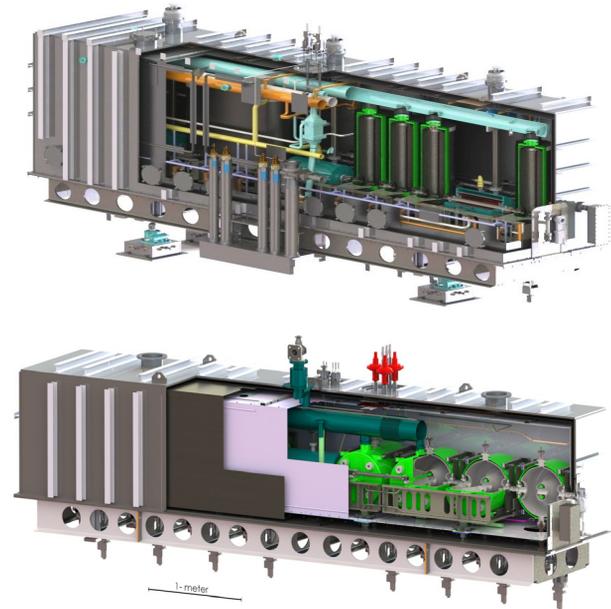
FRIB “bottom-up” cryomodule designs. The top cryomodule contains 8  $\beta_0=0.085$  QWRs, 3 solenoids, and 3 cold beam position monitors; the bottom cryomodule contains 8  $\beta_0=0.53$  HWRs and a solenoid.
